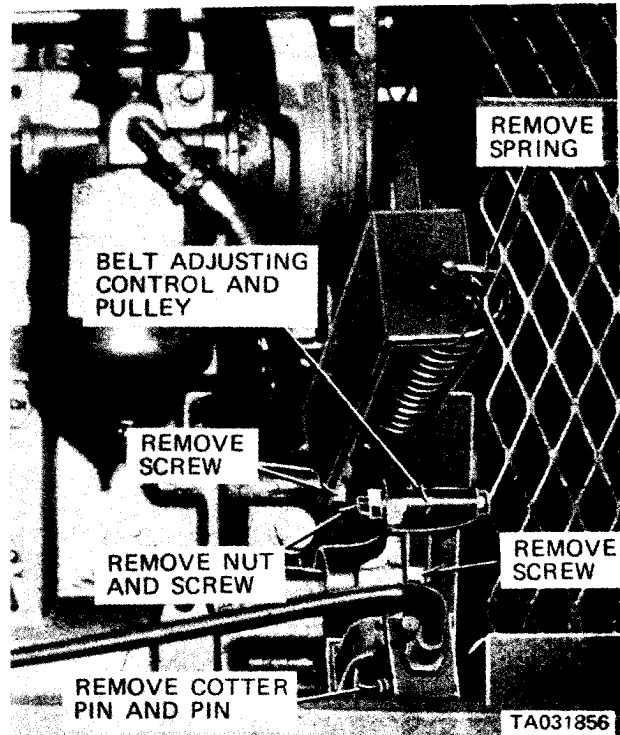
Fan belt tension control, spring and bracket pulley, removal and installation.
